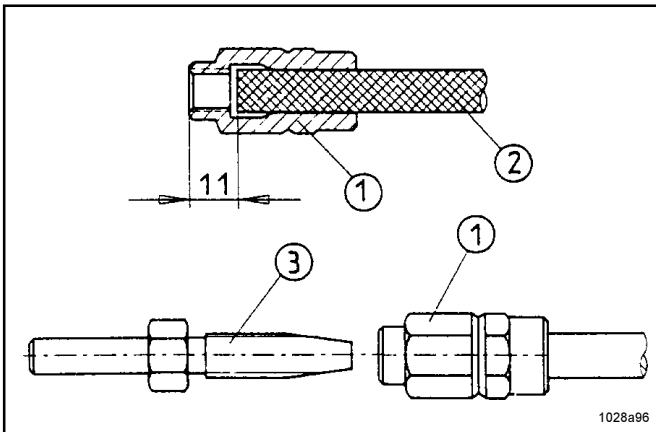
Preassembly of the threaded sleeves and hose studs on the main line
